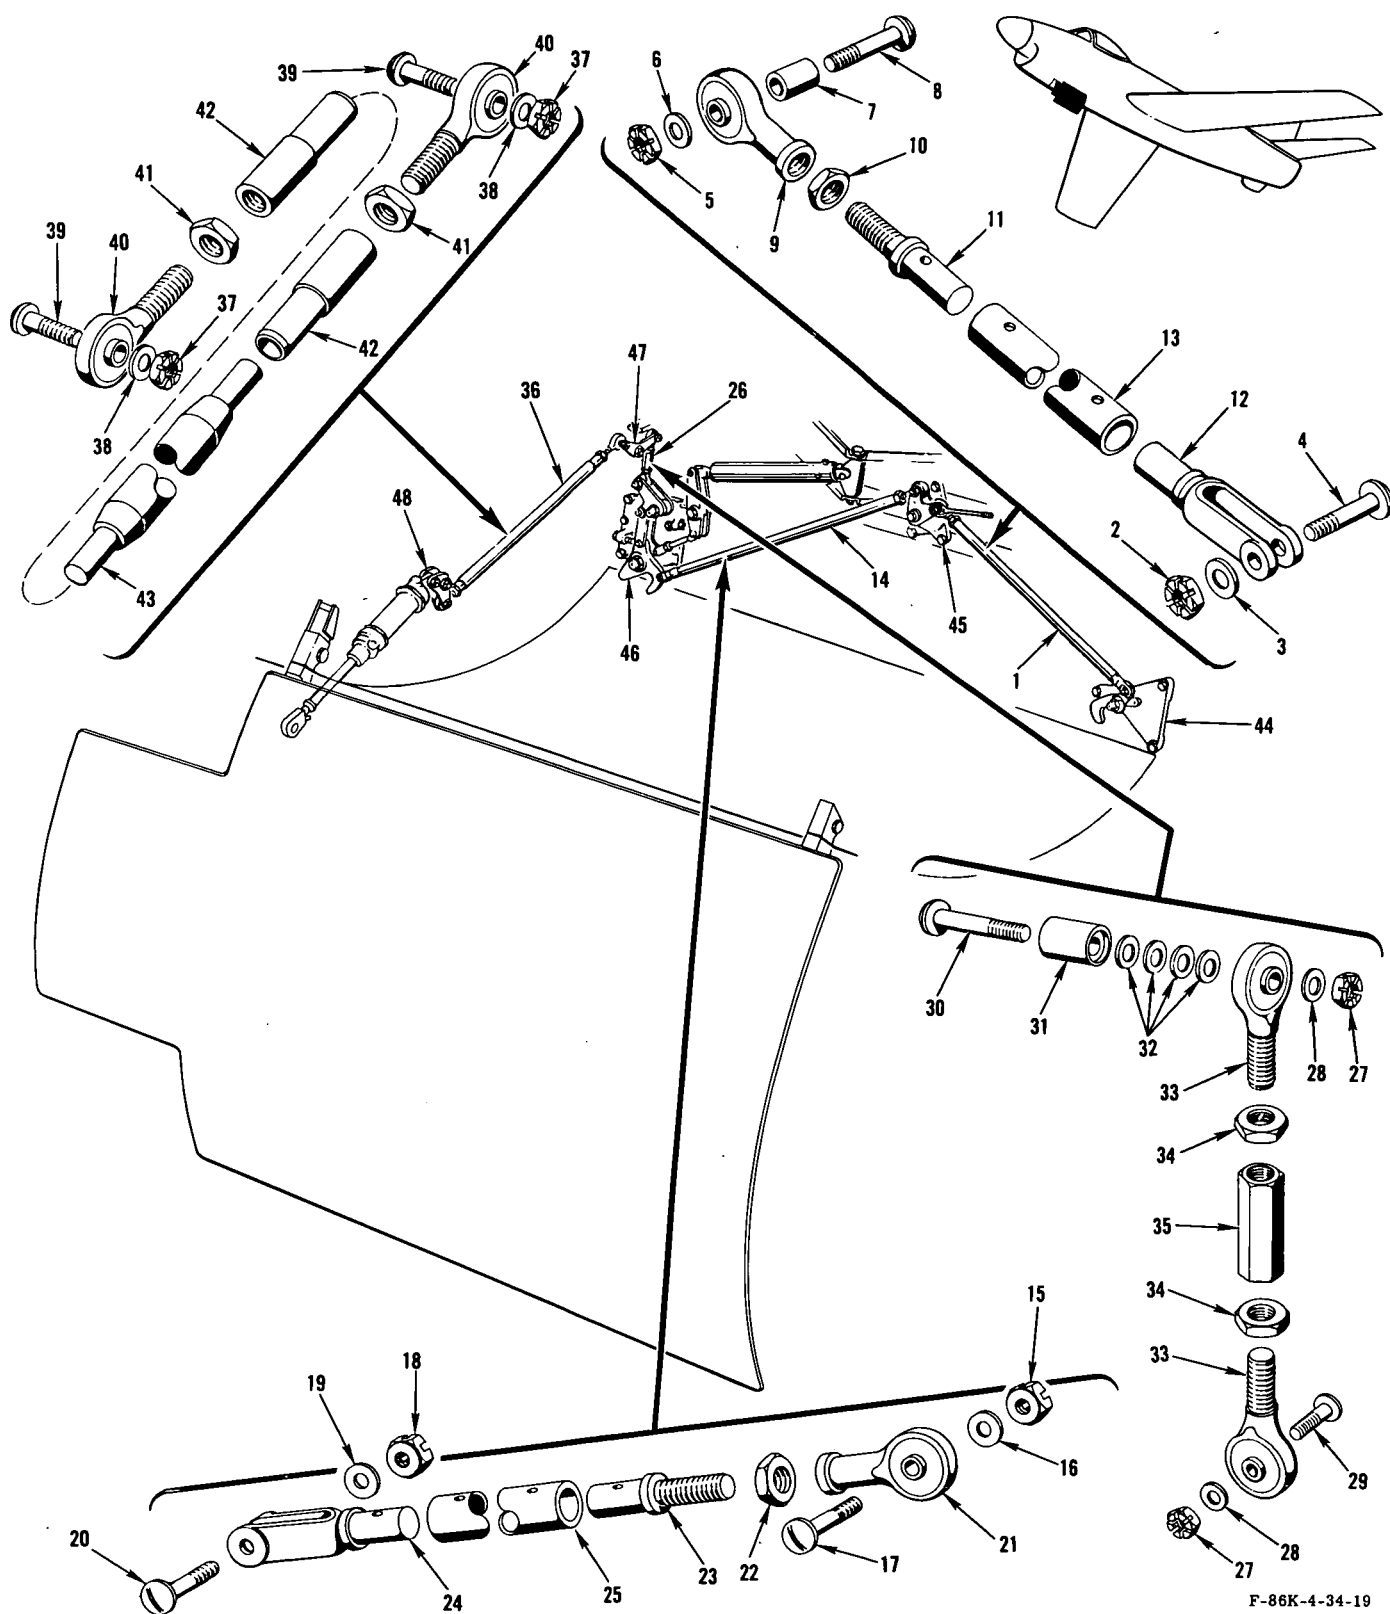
MAIN ALIGNING GEAR OPEN AND CLOSED INDICATOR AND SEQUENCING MECHANISM ASSEMBLIES
